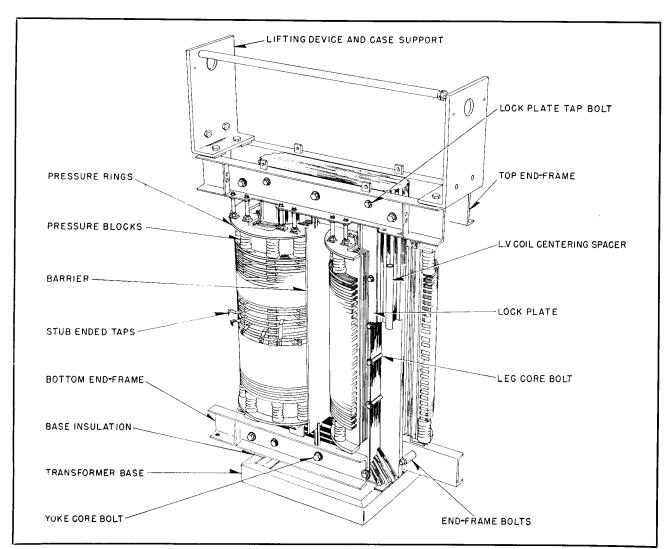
Sectional View of a Single-Phase ASL Core Form Transformer.
